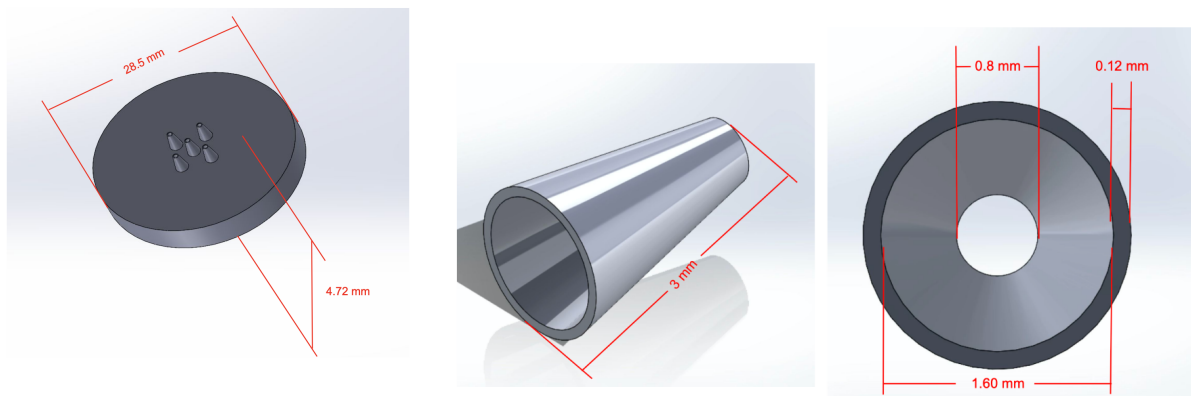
SolidWorks design of microneedle and microneedle array with dimensions.
